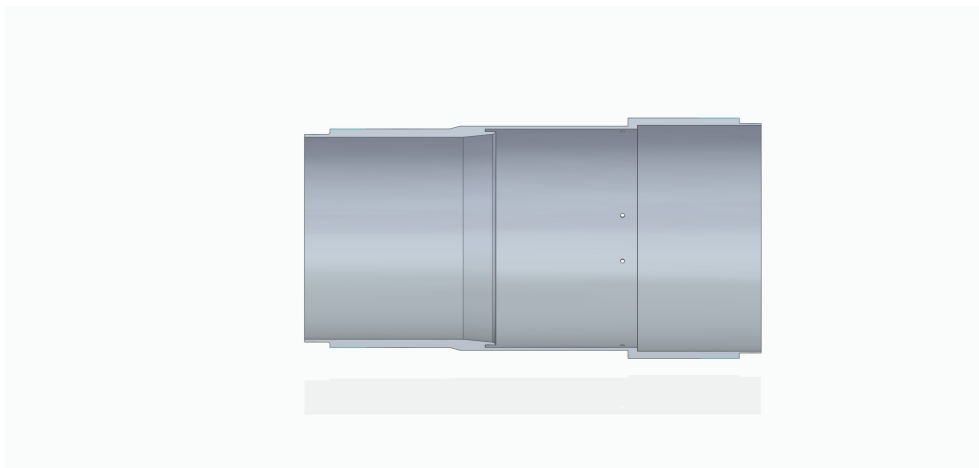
Section view of the Rotor Tube designed by Muñoz
